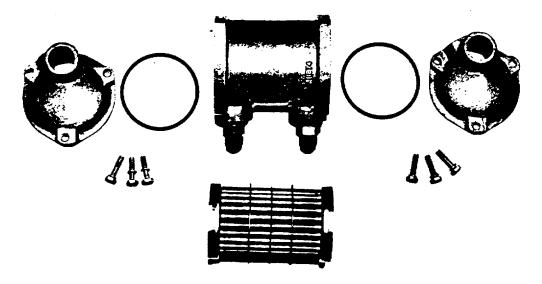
Exploded View of Gearbox Oil Cooler. (lowline engines)
